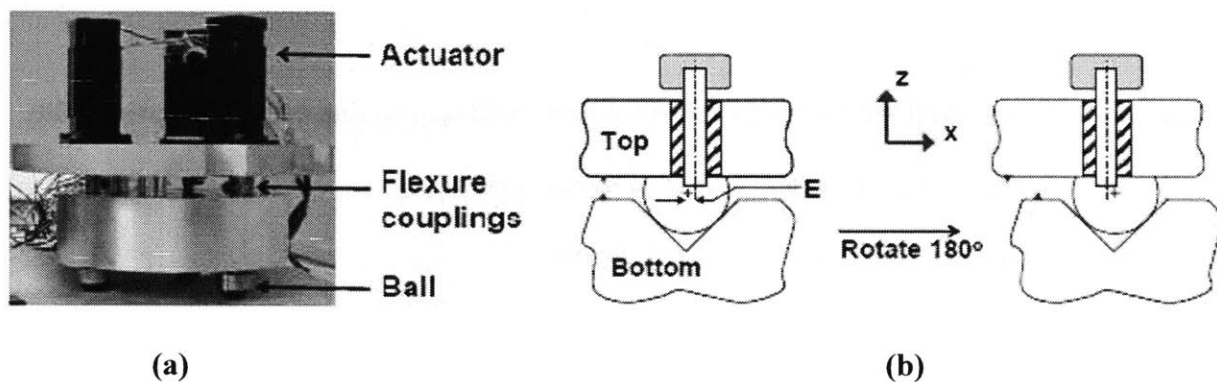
a. Prototype (groove side removed for clarity). b. Adjustable KC joint
